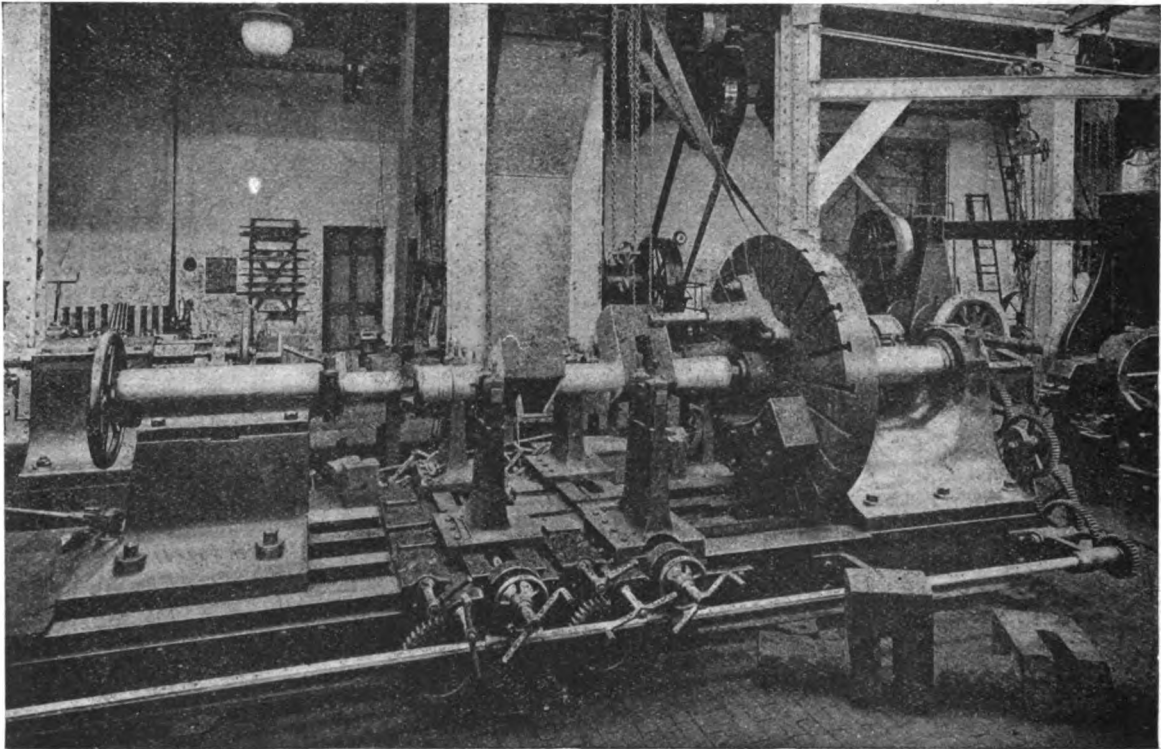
LOCO CRANK-AXLE LATHE: MESSRS. PECKETT & SONS' WORKS, BRISTOL.
